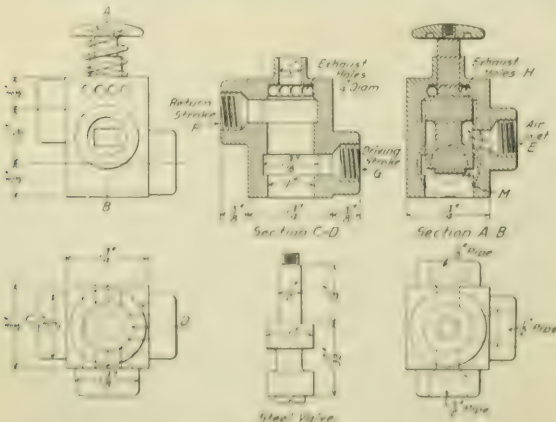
Automatic Valve for Long Stroke Air Hammer.
